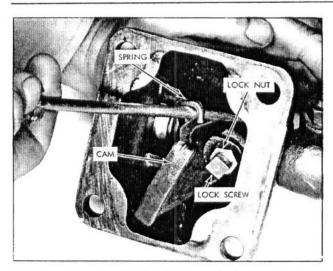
Differential Lock Arm Return Spring Removal or Installation
